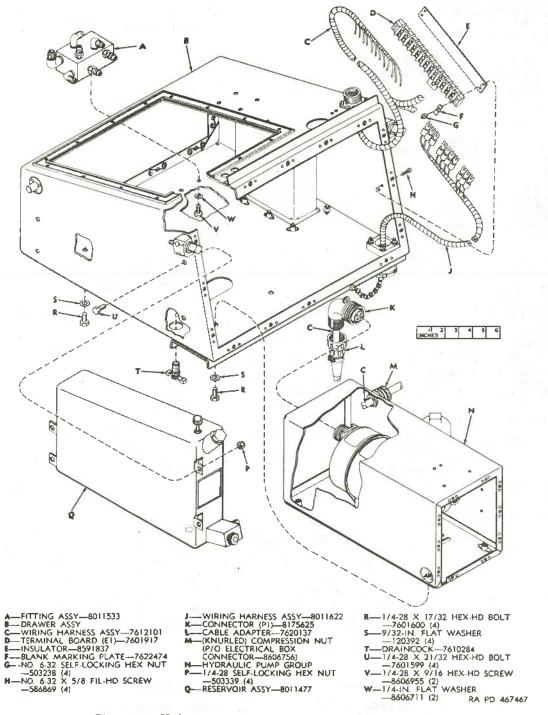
Hydraulic control unit-partially exploded view No. 3.
